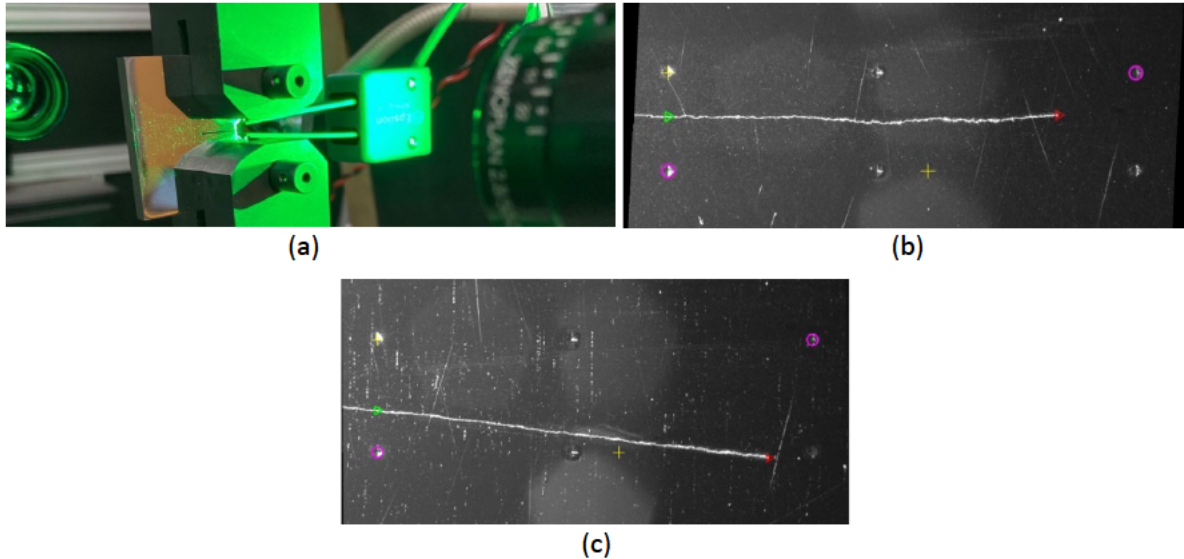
(a) Test setup on the tensile machine showing the C(T) specimen pinned on the clevises with the clip gauge and the two cameras used to monitor the crack during the pre-cracking phase. (b) Near straight and centered propagation of the fatigue crack in a GW-CL specimen from S8. (c) Deviation of crack path out of the symmetry plane in the GW-HAZ of S8.
